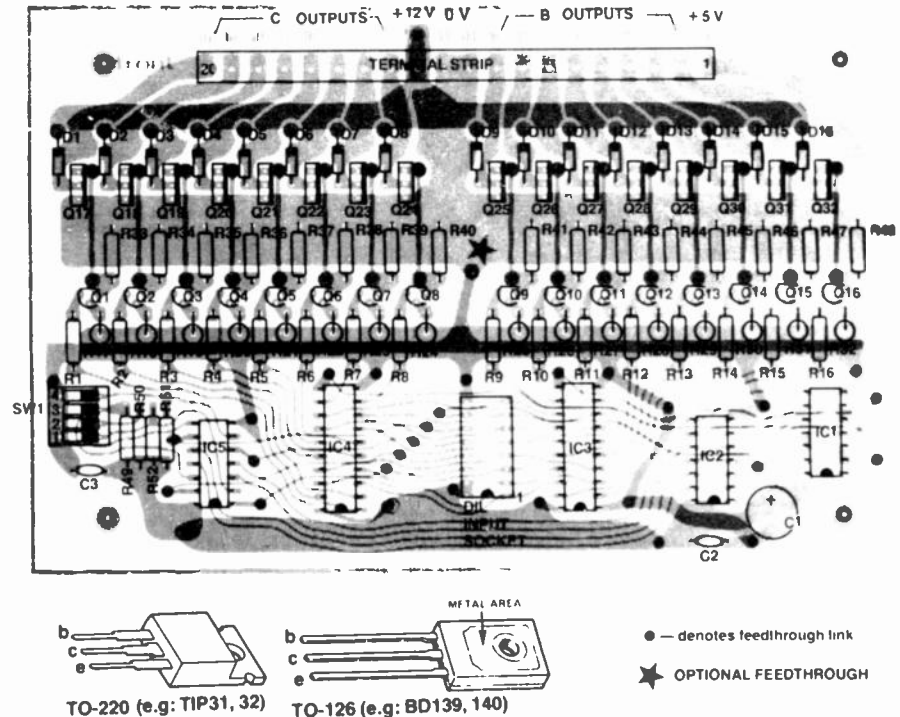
Component overlay for the driver board, and lead details for some suitable output transistors.
